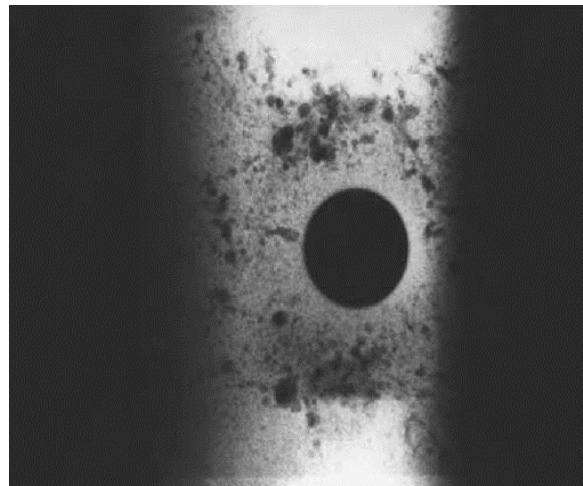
X-radiograph of right-side casting showing excessive porosity caused by air entrapped as liquid metal was injected [4.1]
